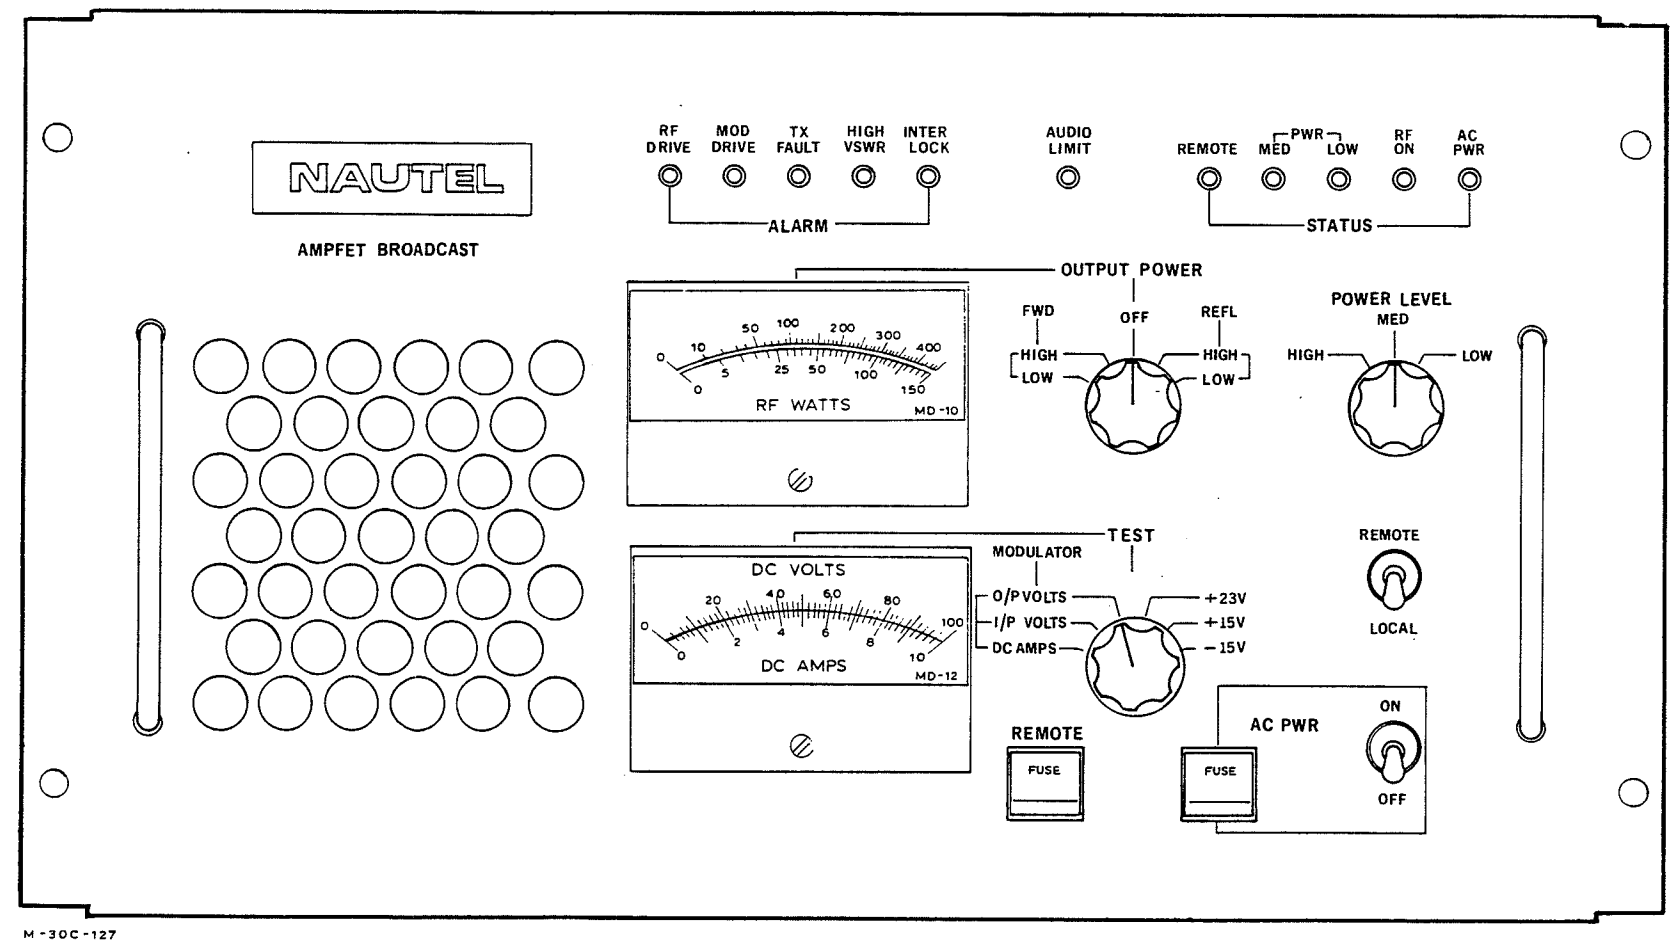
Assembly Detail - AMPFET P400 (Stereo) Transmitter (Front View)
